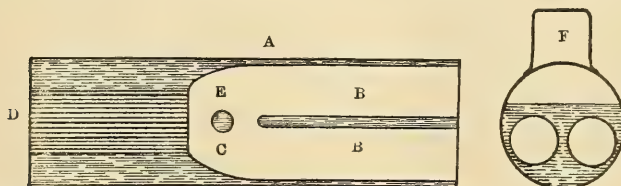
Combined Cornish and Multitubular Boiler. Horizontal and Transverse Sections.
